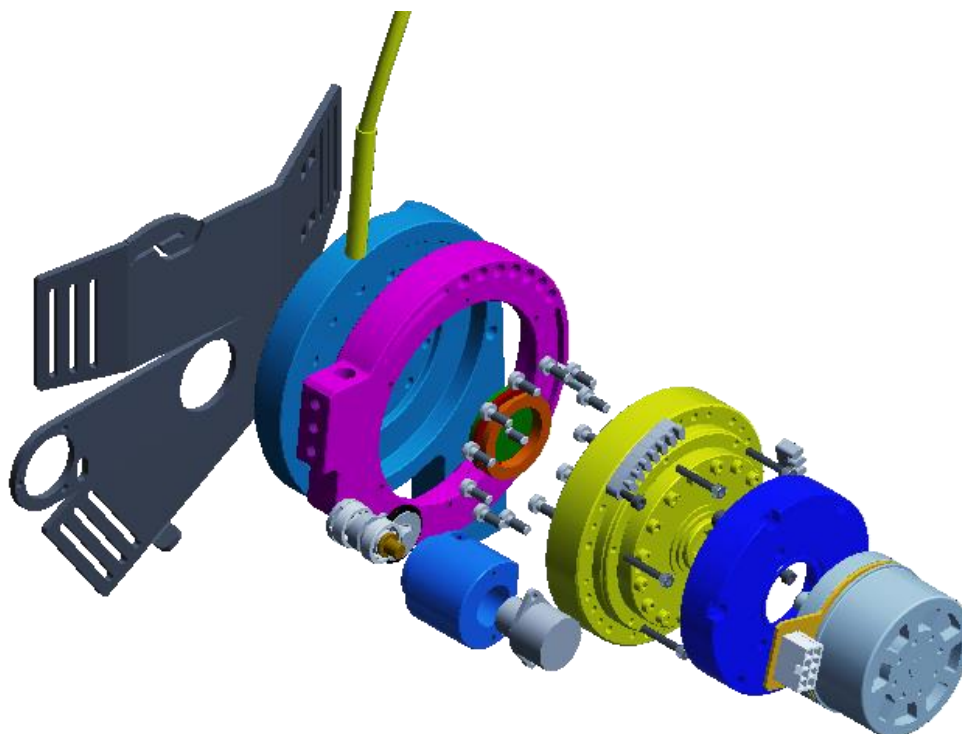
Exploded view drawing of the powered joint: the final solution.
